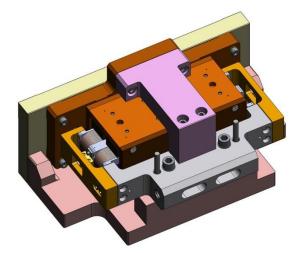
Install Setup Bar. Setup Bar is used to lock Bobbin position relative to Field Assembly, until Actuator is installed in HAM ISI.
